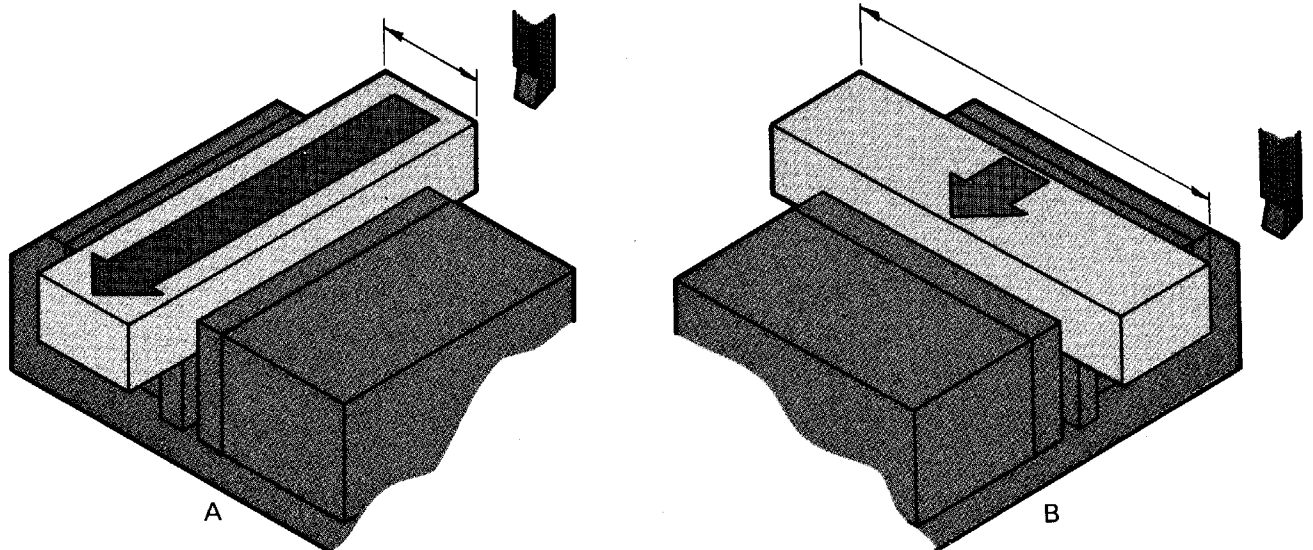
Position work in vise so it can be machined in shortest amount of time. A—Proper setup. B—This setup will take approximately two times longer to machine than other setup.
